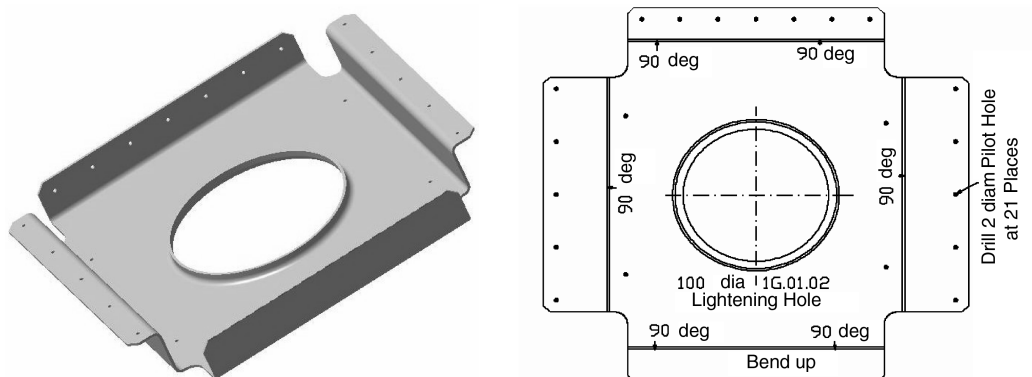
SMC features: multifold flanges, don hole, and pilot holes.
